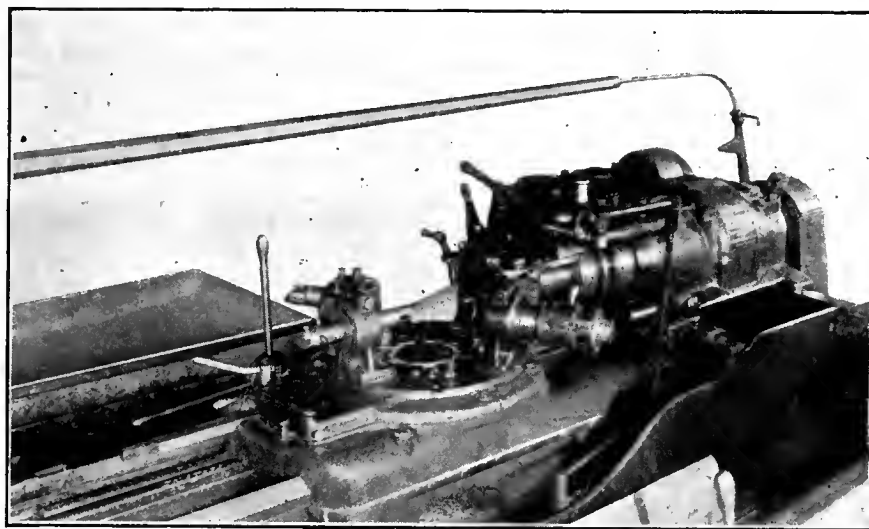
MACHINING AND THREADING NOSE OF 18-PR. SHRAPNEL SHELL.
